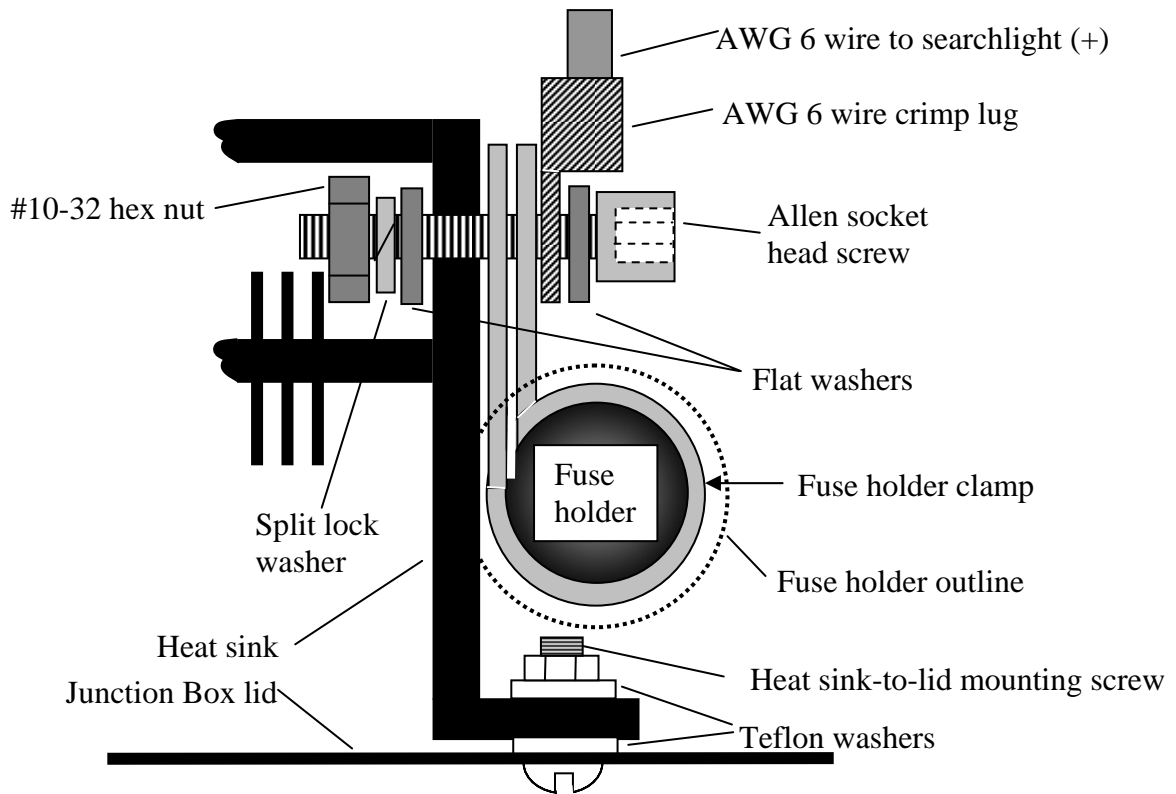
Detail of heat sink, fuse holder, clamp and fasteners
